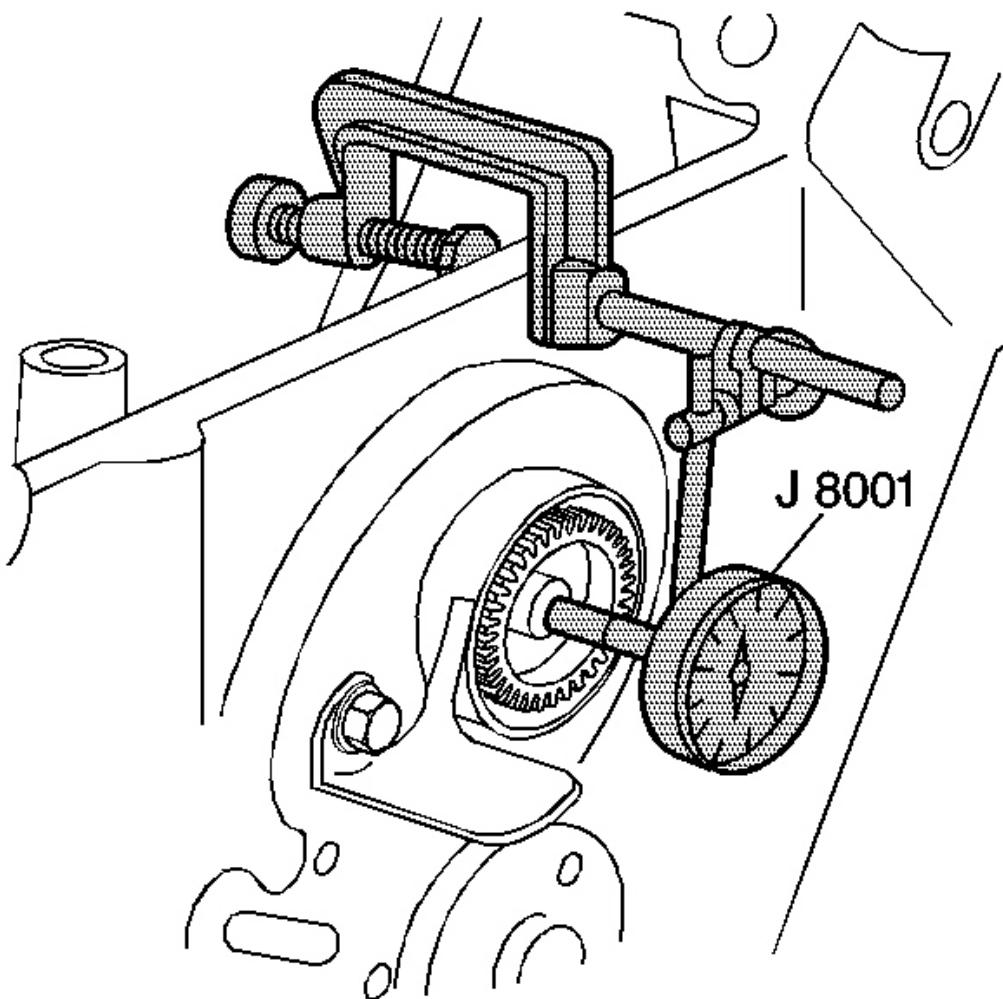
Locating Balance Shaft Driven Gear & Bolt
